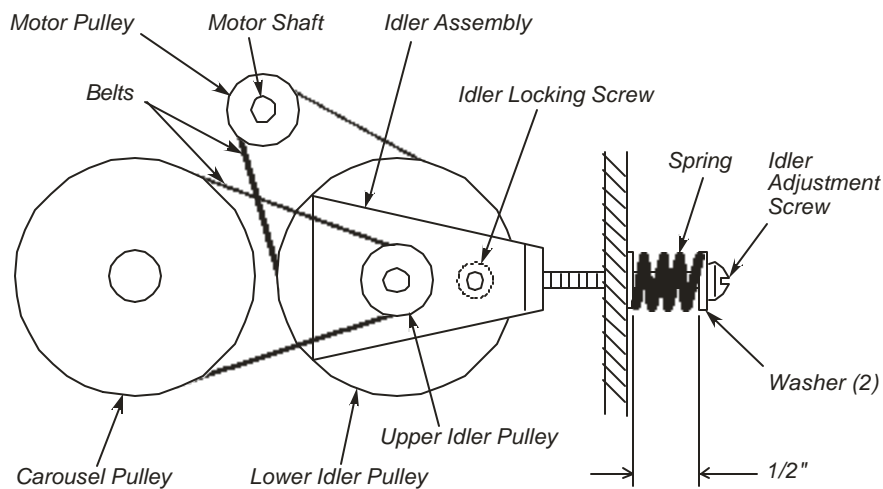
11 Configuration of Carousel Pulleys and Belts.
